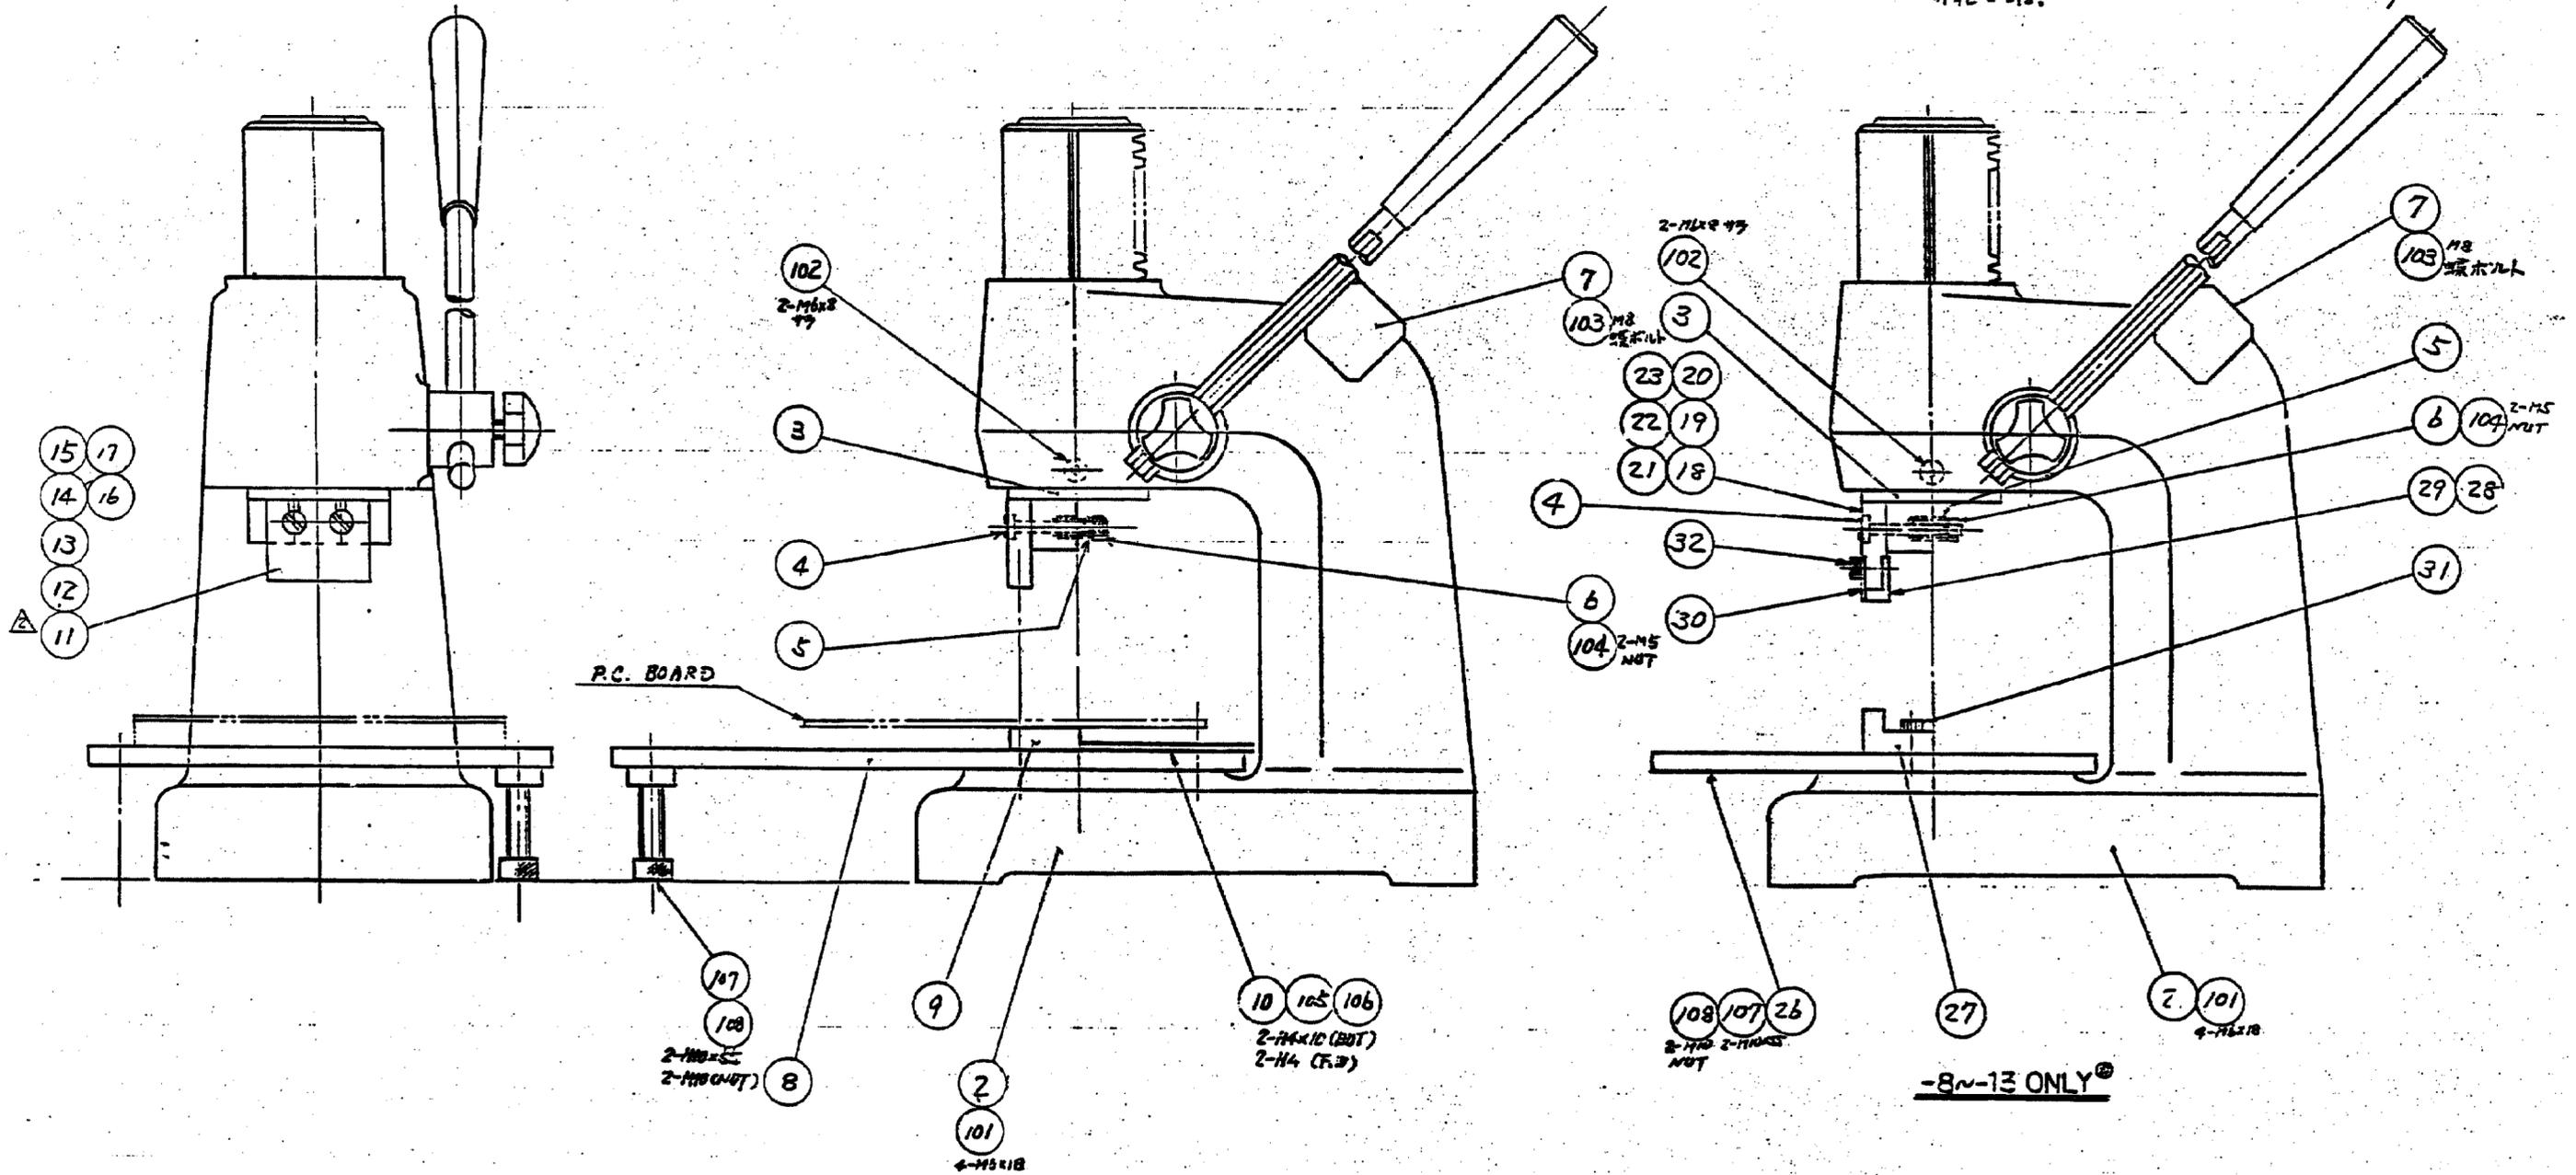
DIMENSIONS IN MM DO NOT SCALE PRINT.
